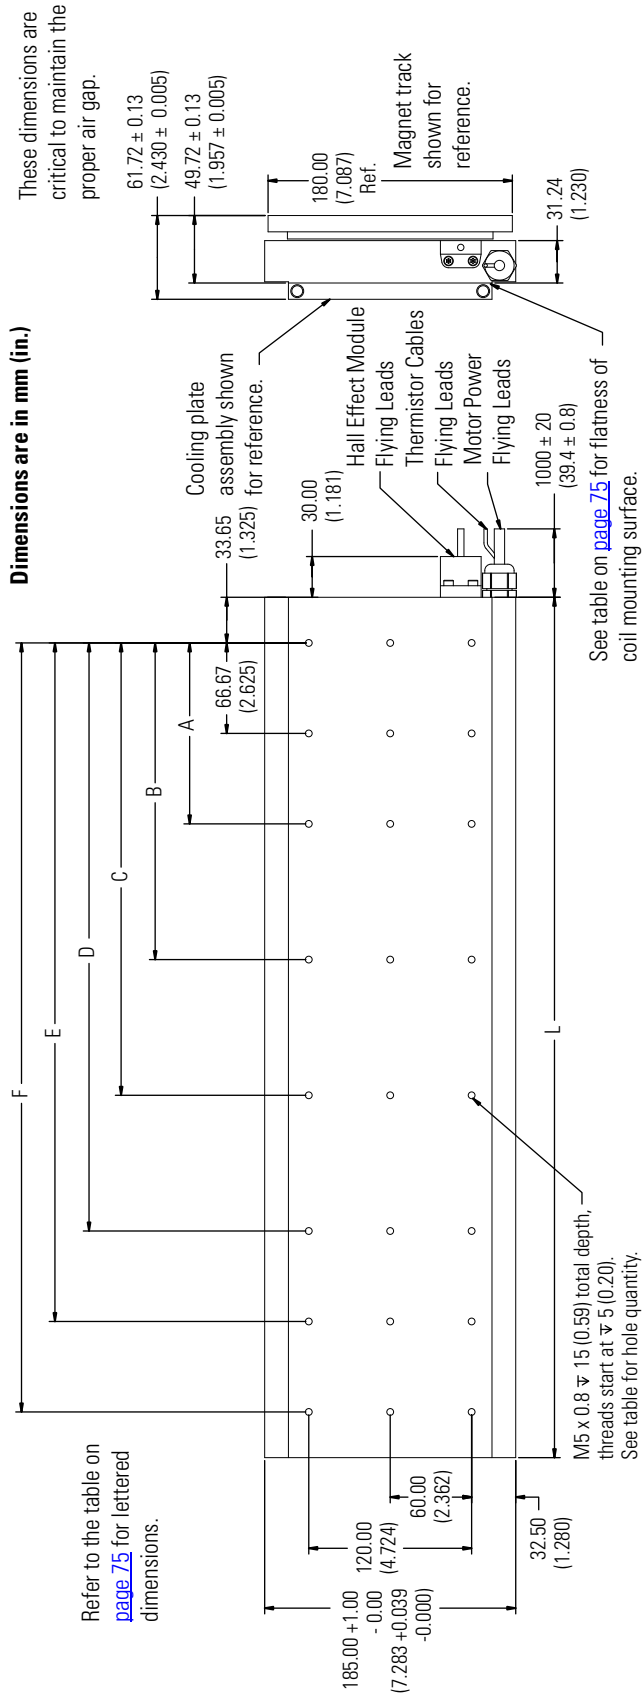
LDC-Series Iron Core Linear Motor Coil Dimensions (LDC-C150xxx-xHT11) with Connectors
